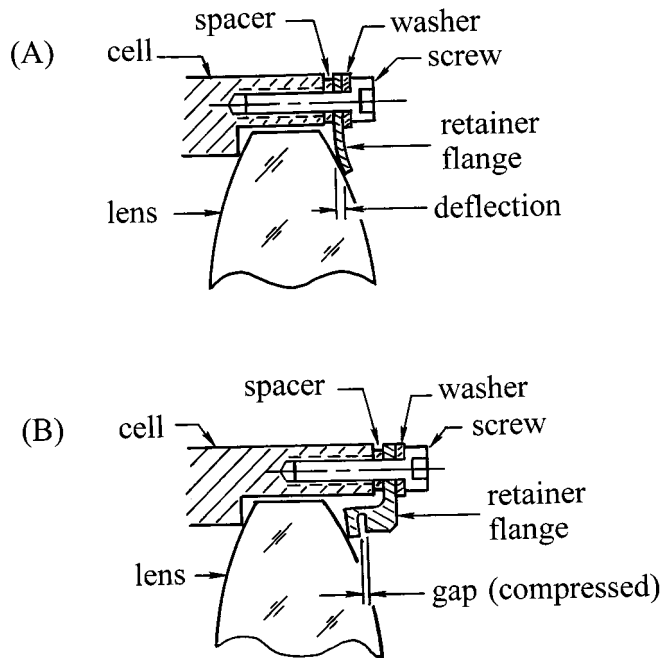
Typical configurations of lenses held in place by clamped flange-type retainers.
